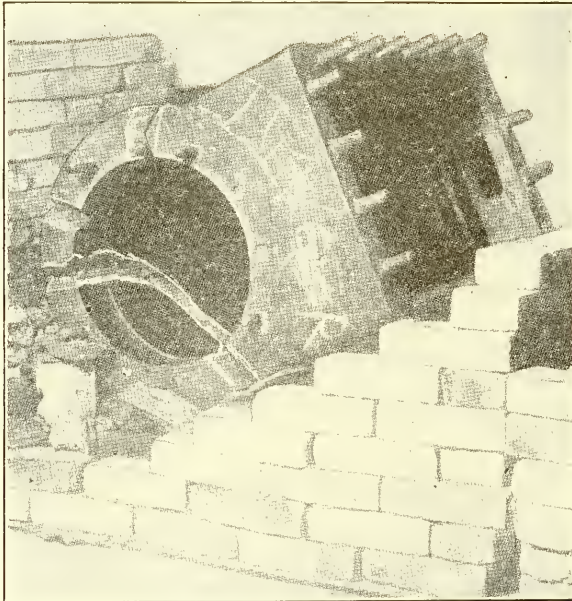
Cylinder Grooved Out for Welding.
